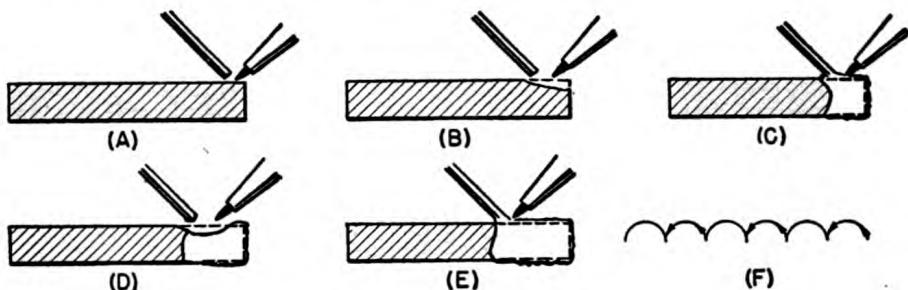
Proper filler rod motion in welding sheet aluminum.
